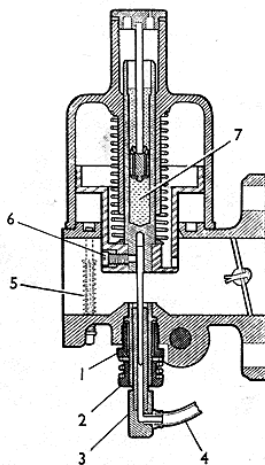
SECTION VIEW OF THE HS4 CARBURETTER.
